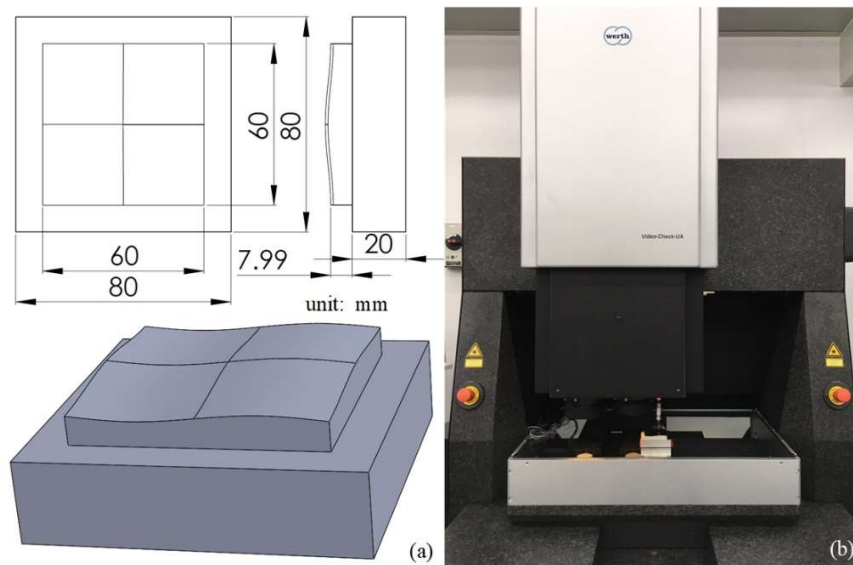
Actual measurement experiment, (a) design of the workpiece, and (b) measurement process
